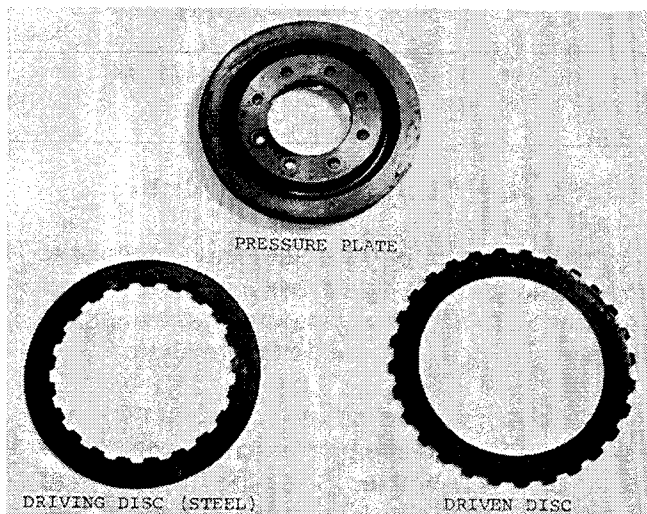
CLUTCH DISCS AND PRESSURE PLATE
